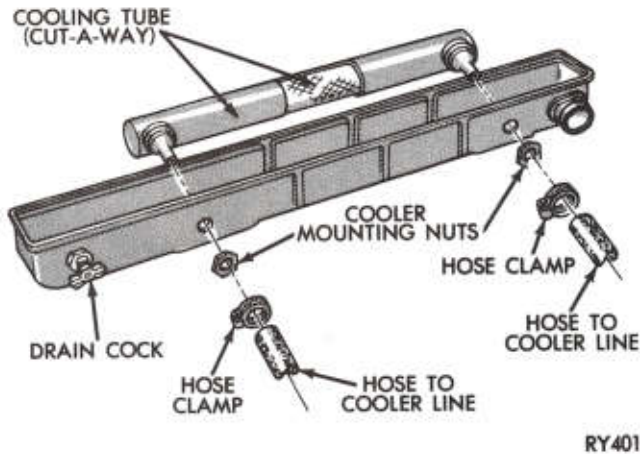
Transmission Oil Cooler Tube, Radiator Lower Tank
